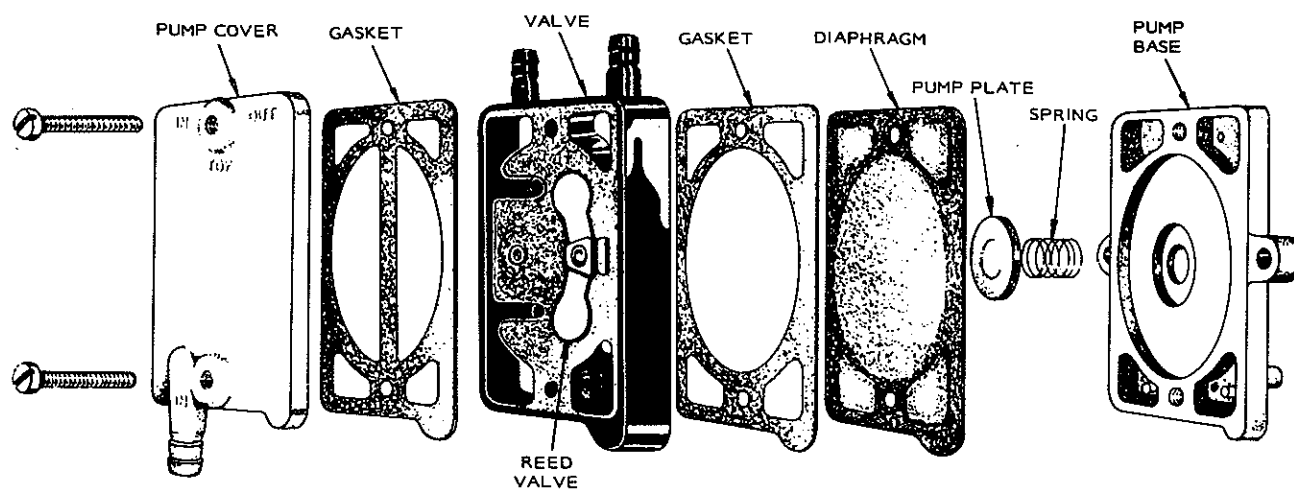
BF ENGINE PULSATING DIAPHRAGM FUEL PUMP
